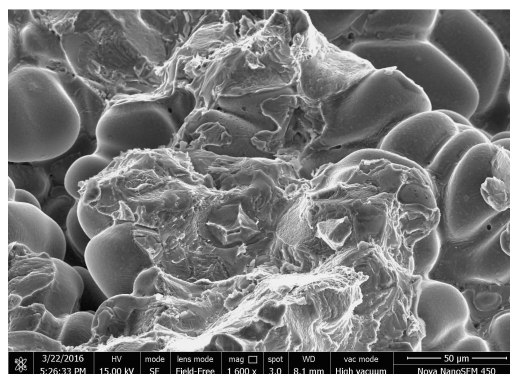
SEM Photographs of Tensile Fracture of 120 mm/min-Joint FSW
